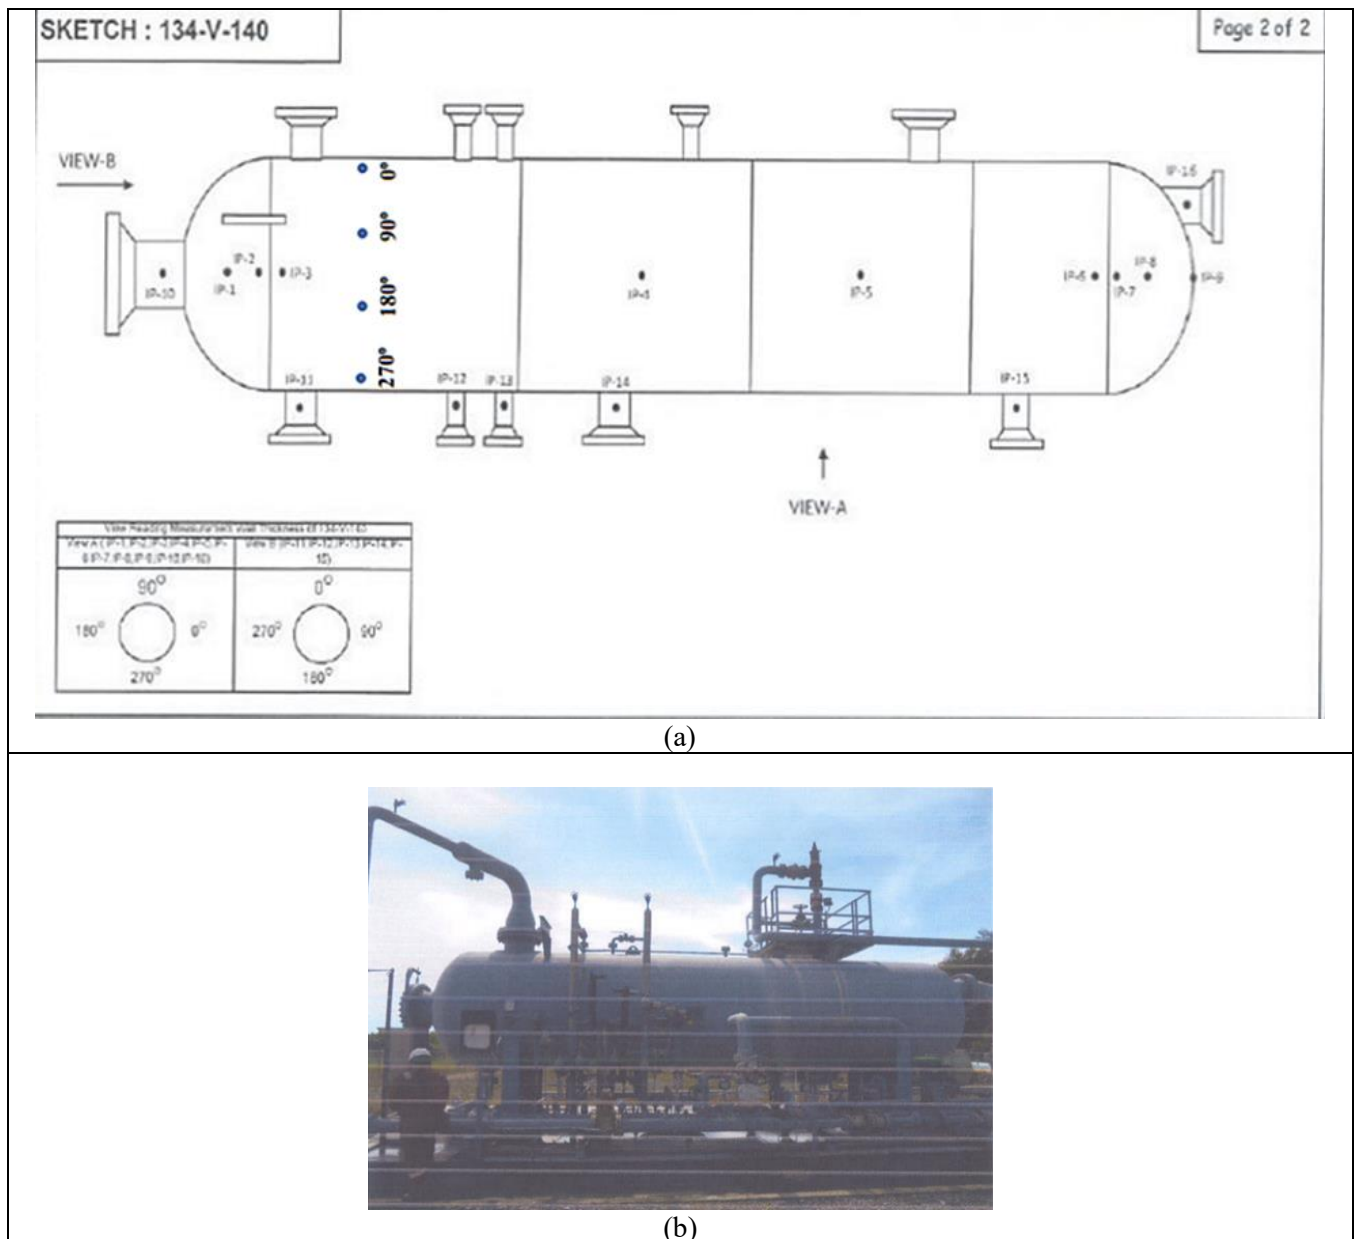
Shell 1st Stage Separator (a) Shell 1st Stage Separator Technical Drawings and NDT Test Points; (b) Photographs of Shell 1st Stage Separator components in the field.
